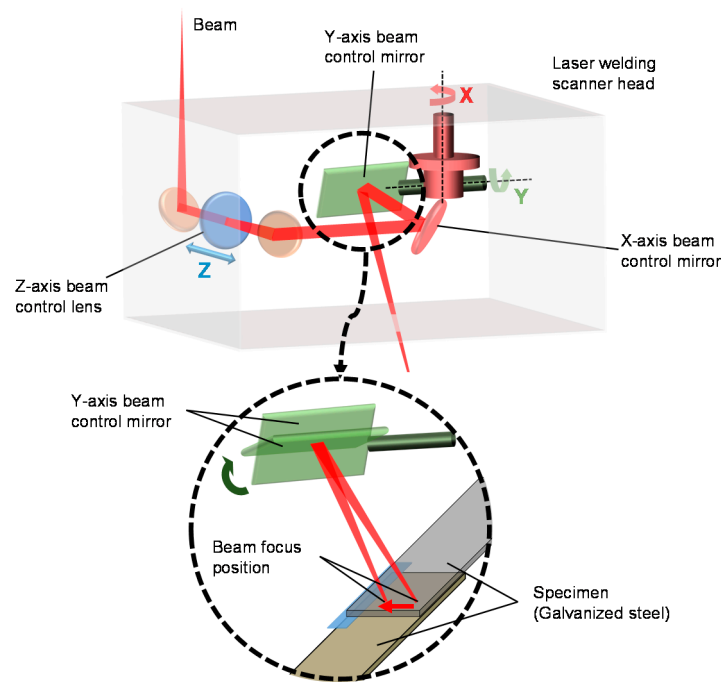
A schematic illustration of a laser welding scanner head that can easily change the direction of welding.
